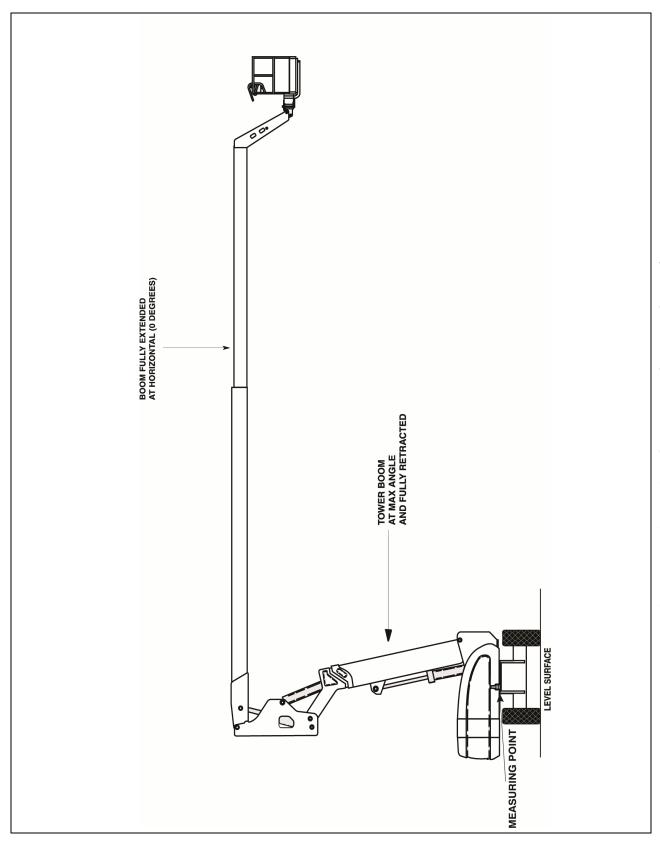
Swing Bearing Tolerance Boom Placement (Sheet 2 of 2)
